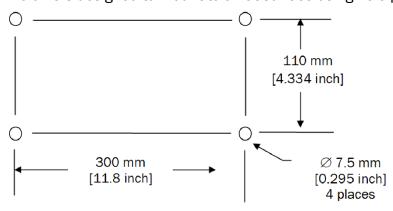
Mounting Hole Pattern for Stainless Steel Housings
